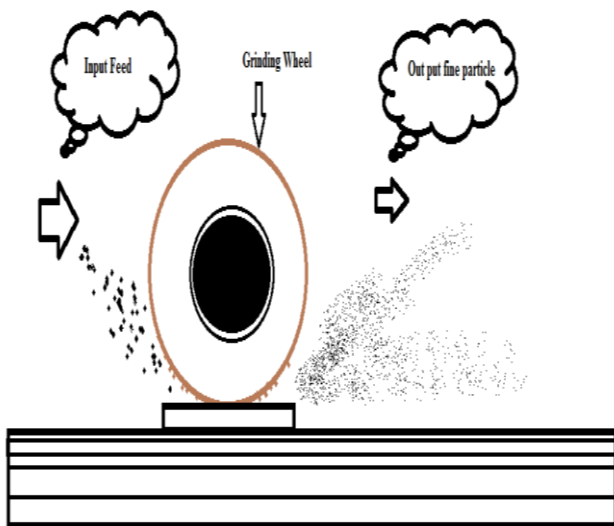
Arrangement of grinding wheel in surface grinding machine
